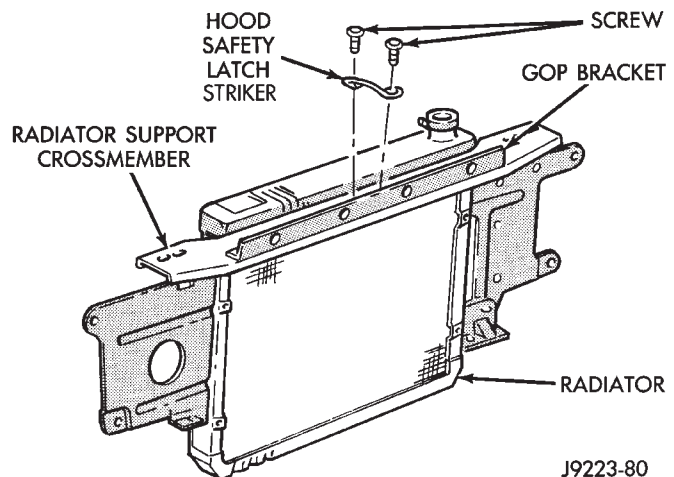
Hood Safety Latch Striker—2.5L Engine (Typical)
